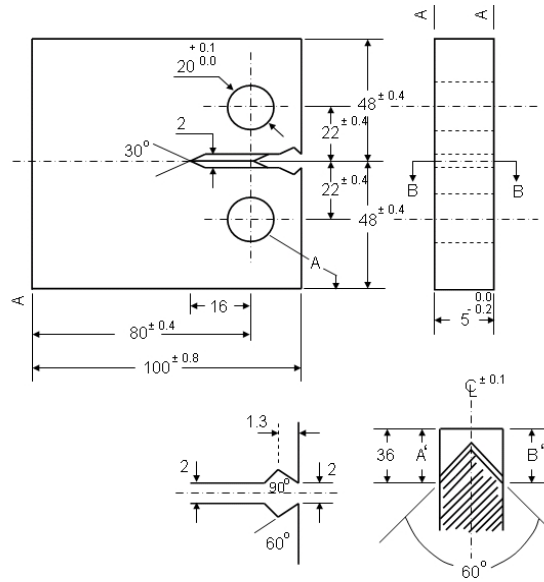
Dimensional details of the C(T) specimen (dimensions in mm).
